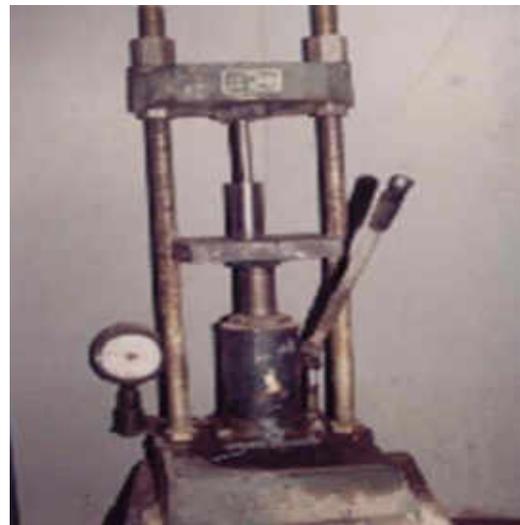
Hydraulic compressive machine (used in moulding the electrode)
